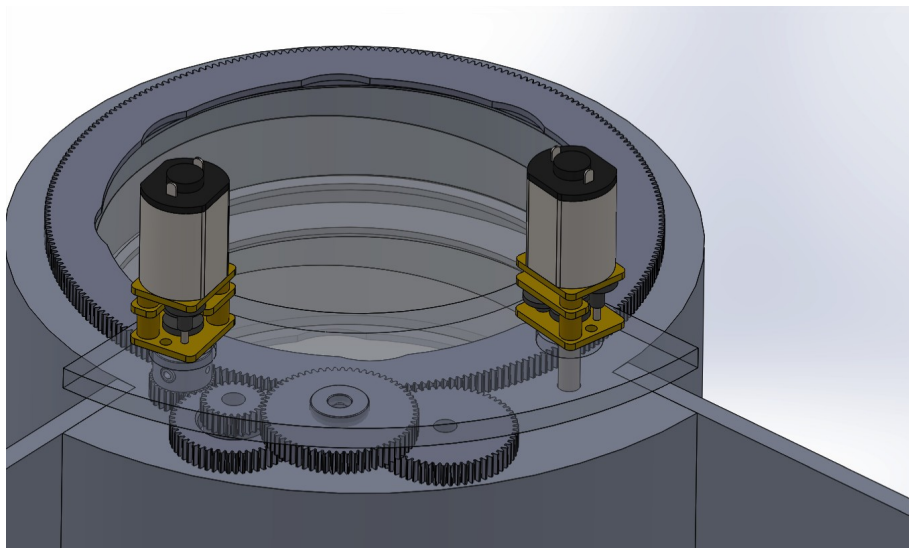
Absolute encoder gear train. 10:1 total. The encoder is on the gear on the right.
